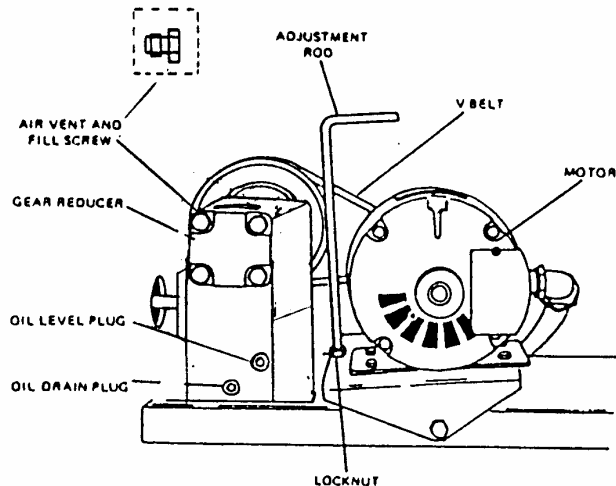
Conveyor Drive Gear Reducer and Motor
